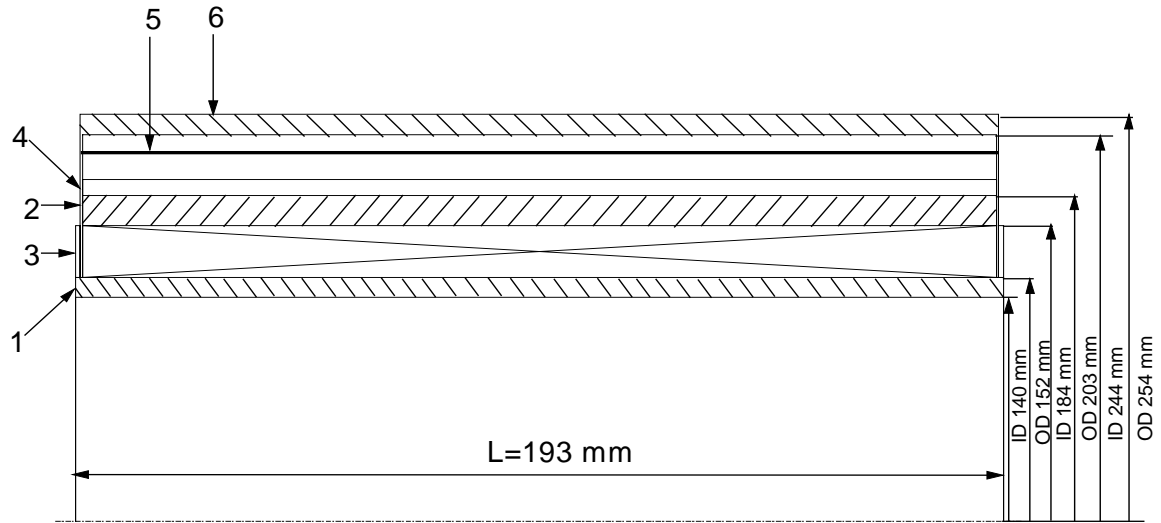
The cooling section solenoid module. 1- inner aluminum tube, 2- outer aluminum tube, 3- gap correctors, 4- dipole correctors layer, 5- μ -metal shield, and 6- iron magnetic shield.
